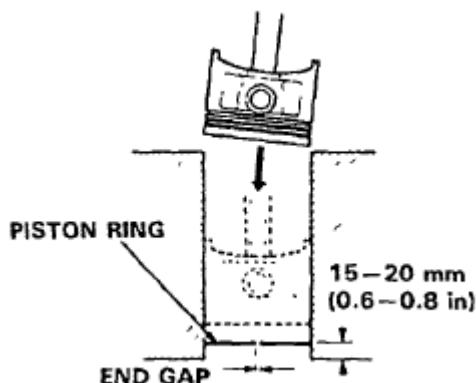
Measuring Piston Ring End-GapCourtesy of AMERICAN HONDA MOTOR CO., INC.REPLACEMENT
